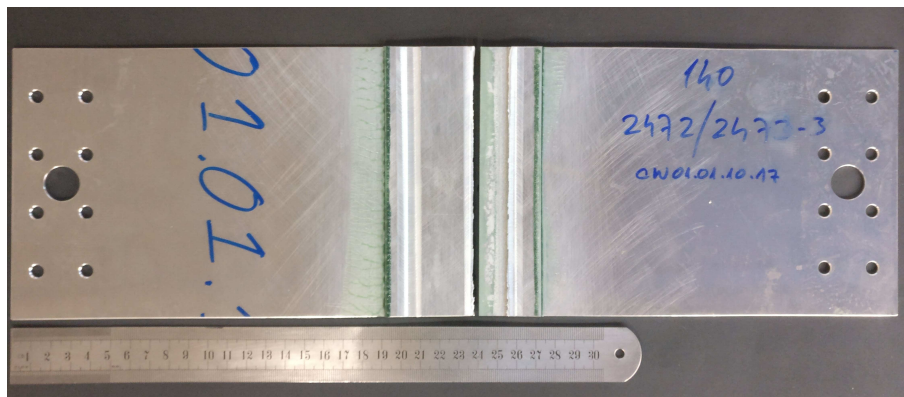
Typical failure surface of cyclic load friction stir weld-bonding fuselage butt joint.
